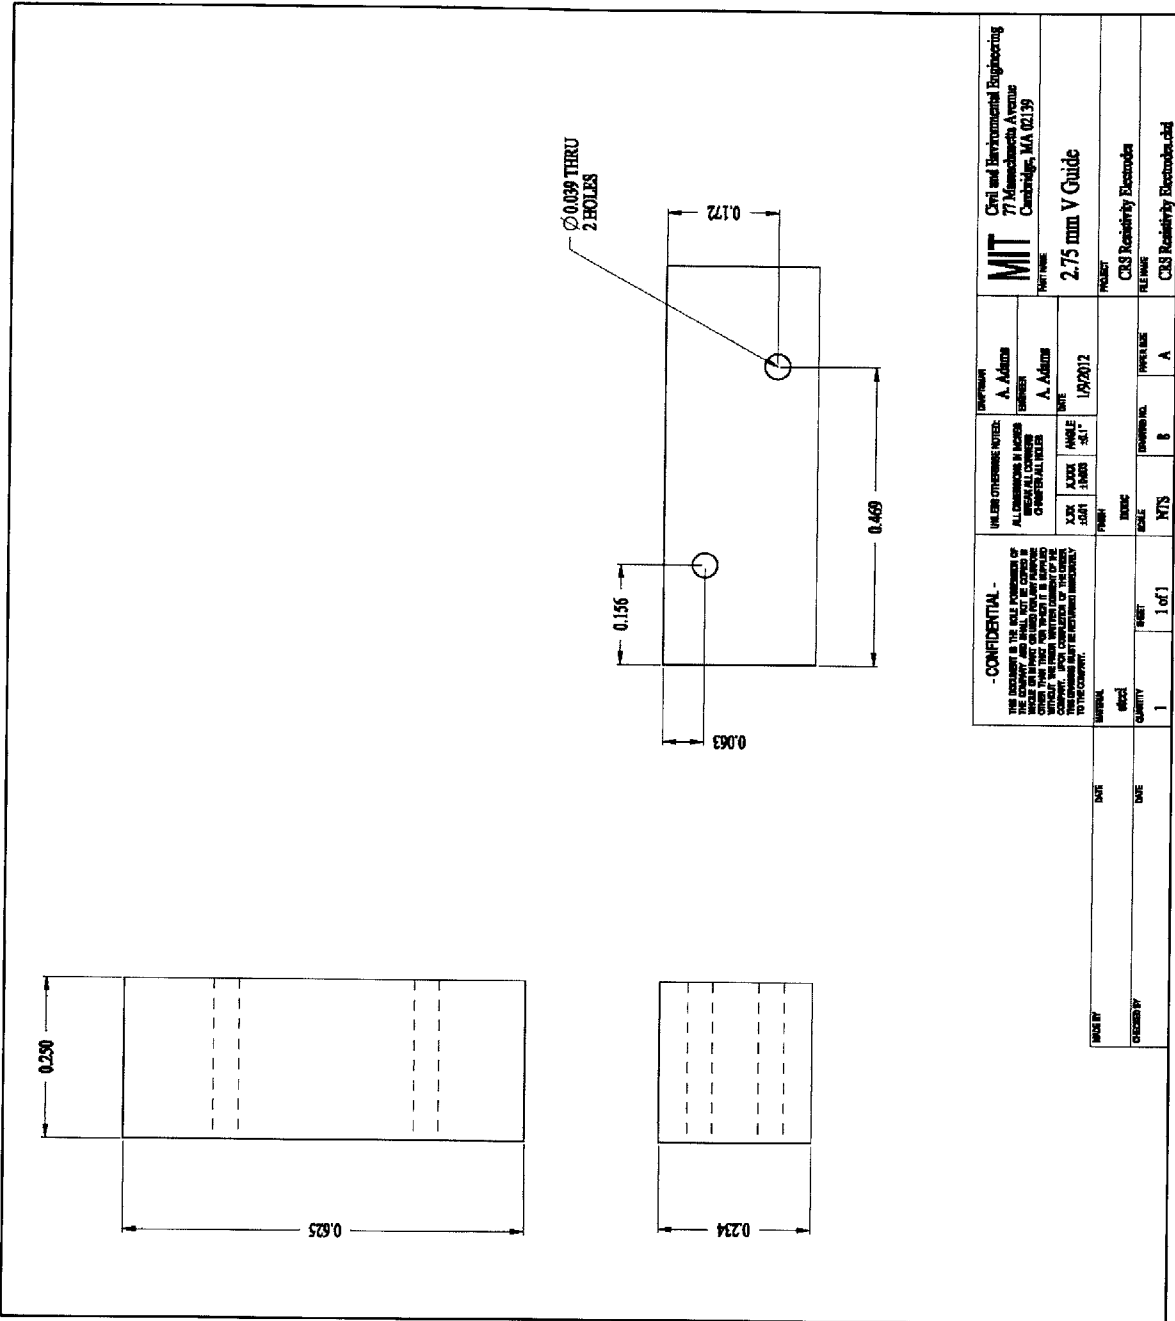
CRS Electrodes: Drawing 8, 2.75 mm drilling guide
